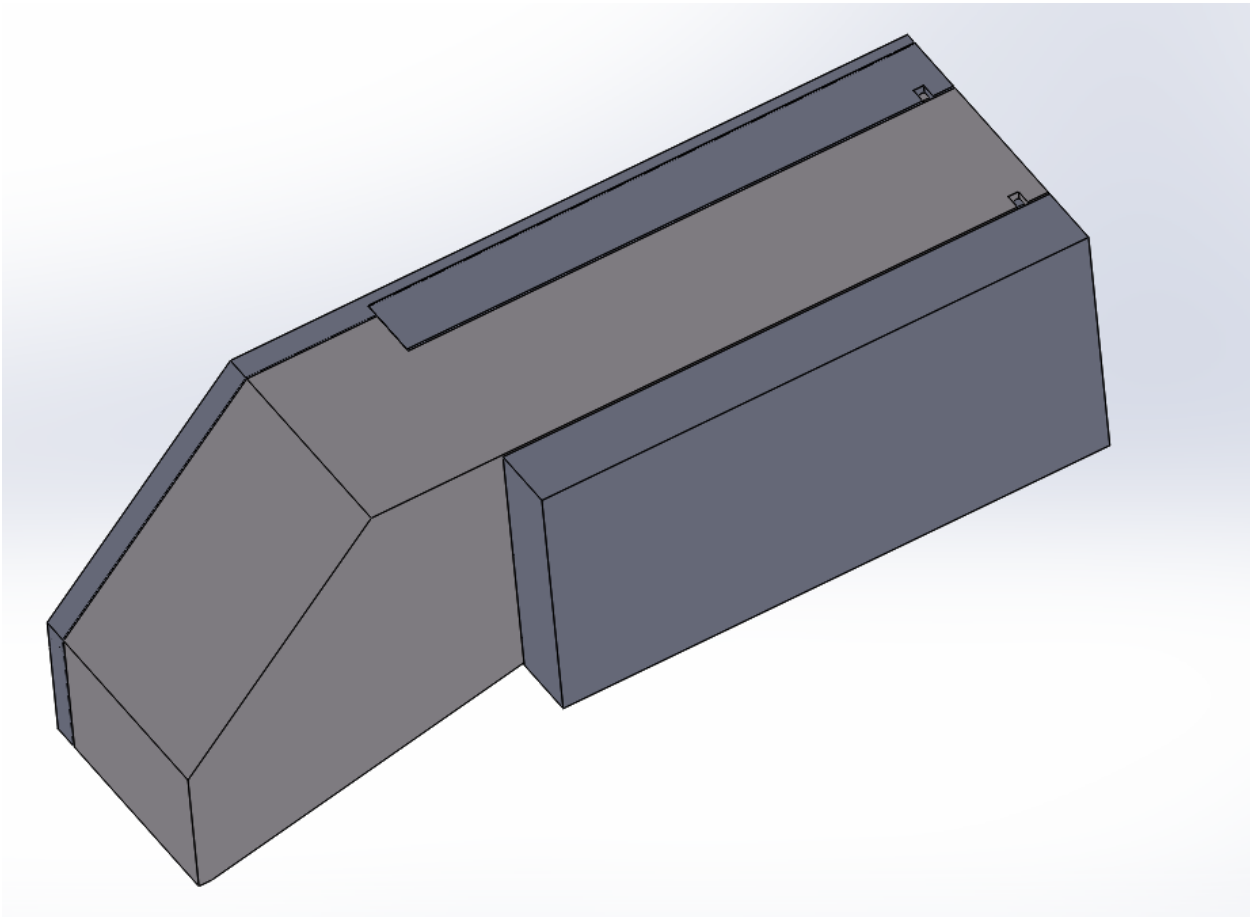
Isometric front view of the winch assembly attached to the vent mount assembly.
